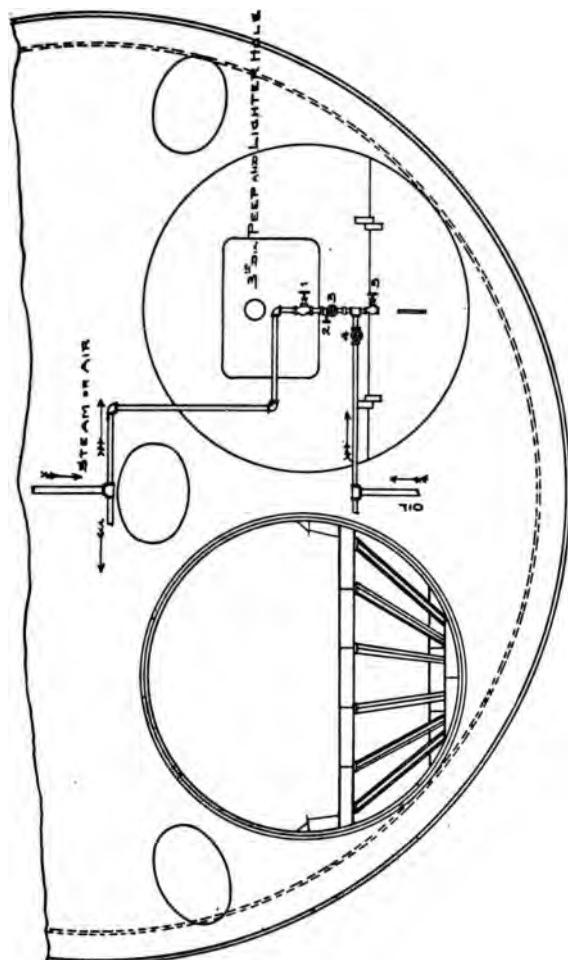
Cross Section of Burner Arrangement for Scotch Marine Boiler.
